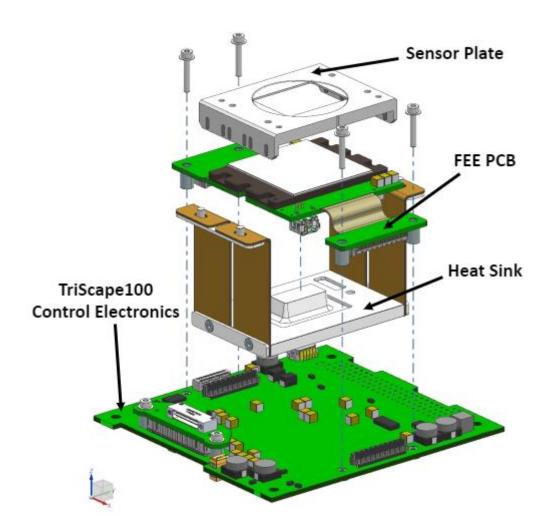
Exploded View of TriScape100 Sensor Unit and Control Electronics
